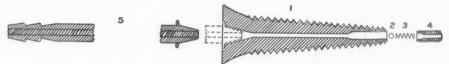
Improved cervical cannula. 1. Cannula. 2. Ball valve. 3. Valve spring. 4. Valve plug. 5. Stem.
